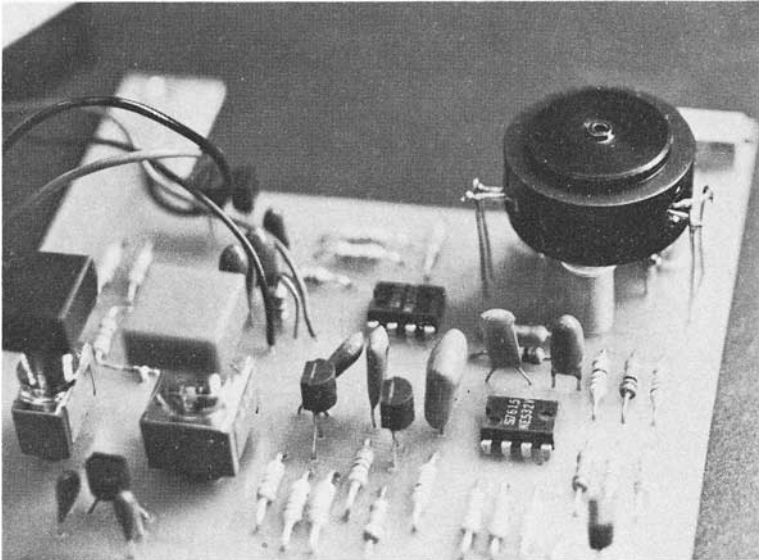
View of the printed circuit board showing the sealed lamp/detector assembly at the top right corner.
